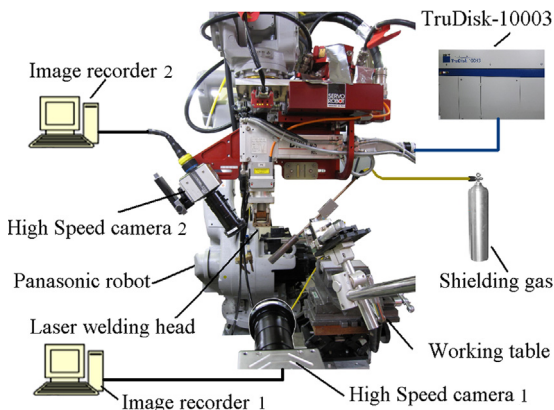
Experimental setup of high-power disk laser bead-on-plate welding.
